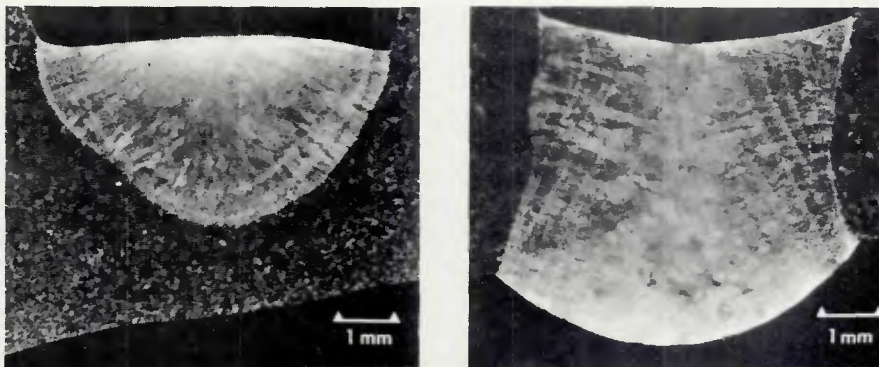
Welded butt joints on 304L stainless steel using 308 filler metal wire with (left) pure argon and (right) argon plus 700 ppm SO_2 shielding gases. All other welding variables were unchanged; the SO_2 was simply turned off when the weld was partially completed. Current—163 A; travel speed—130 mm/min; feed speed of 0.045 in. wire—750 mm/min
